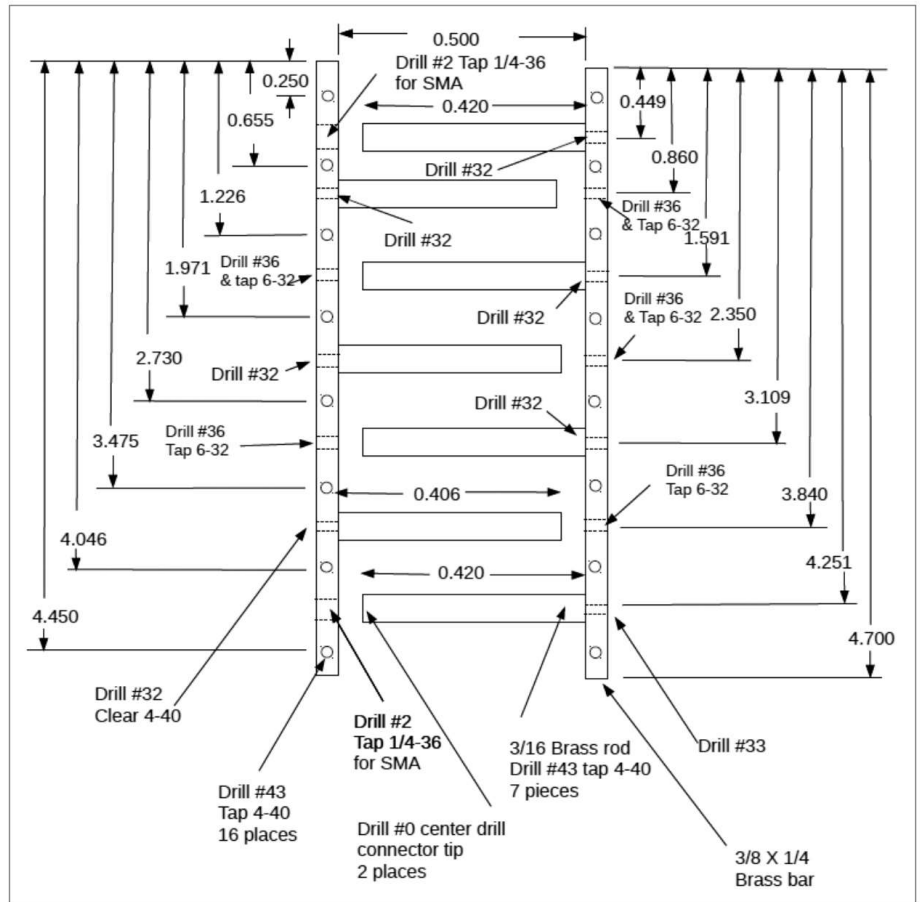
Mechanical drawing for 5760 MHz test filter. While not specified in the drawing, the edge and side bar holes are located along the bar and side center line.
